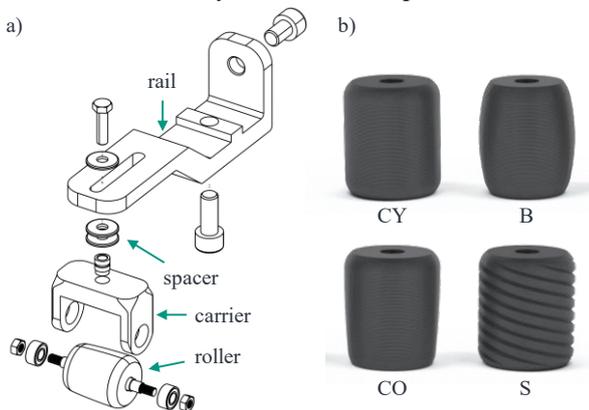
a) Roller holder, b) Roller geometries: cylindrical (CY), barrel-shaped (B), conical (CO), cylindrical with spiral profile (S)
